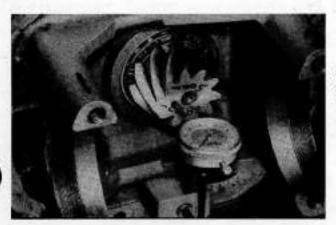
View showing pro-per dial indicator position for setting pinion shaft bearing preload.
